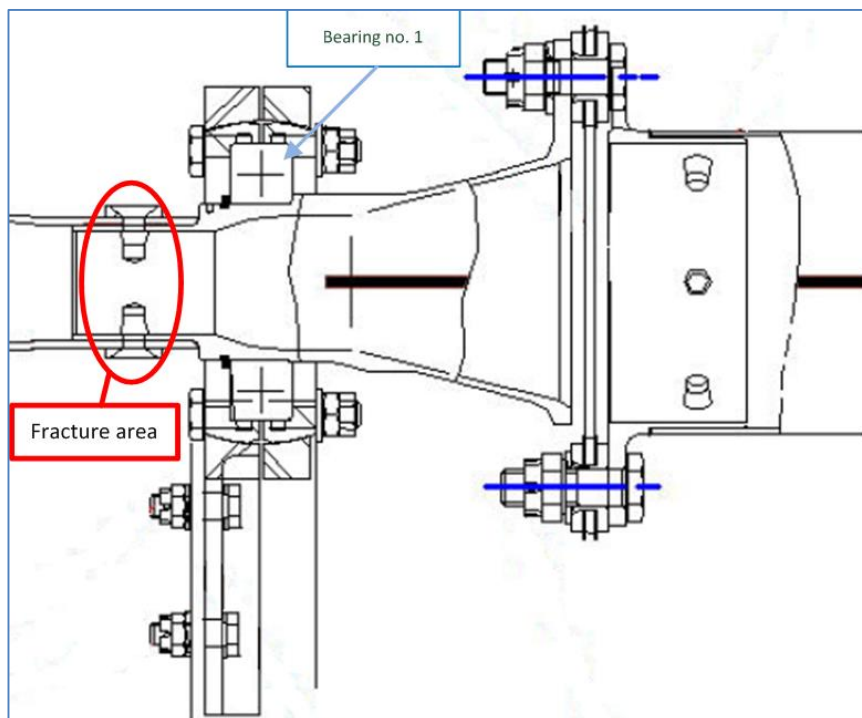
Details bearing no. 1. The flexible coupling on the right. Damage area marked in red.
